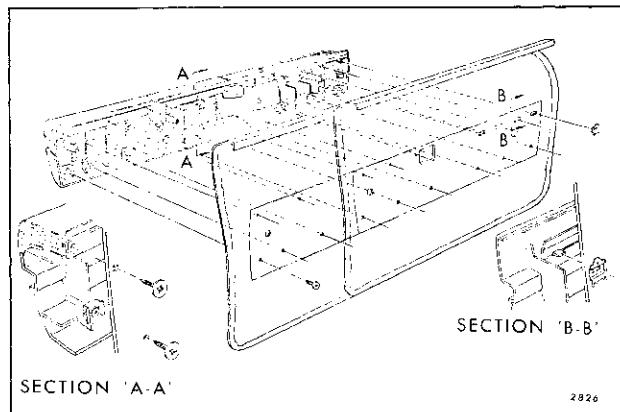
Door Arm Rest Installation - "C" and "E" Styles
